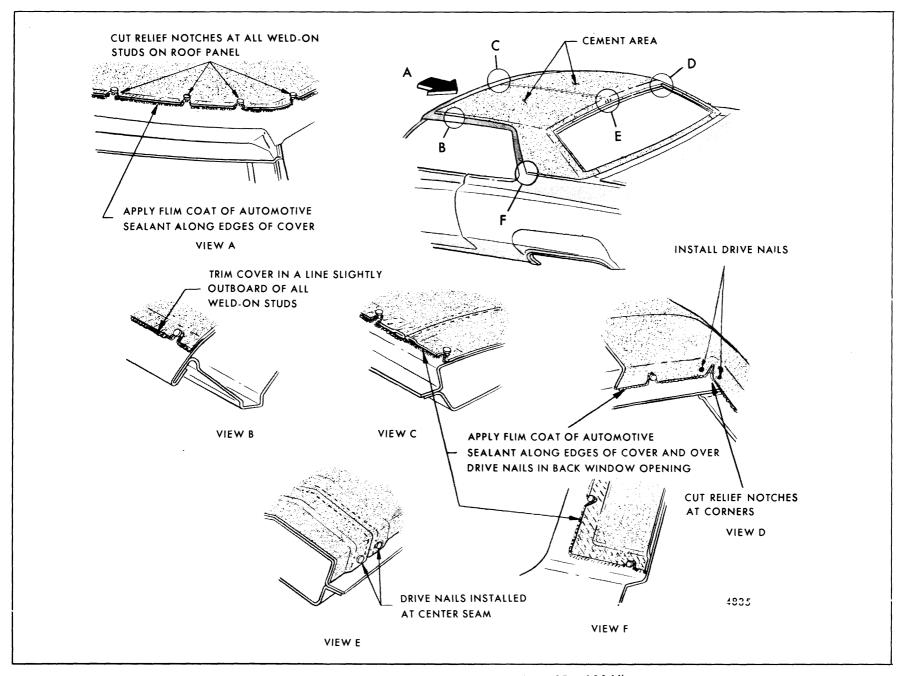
Typical Fabric Roof Cover Installation With Roof Panel Moldings
